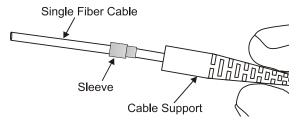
Cable Support and Sleeve on Single Fiber Cable
